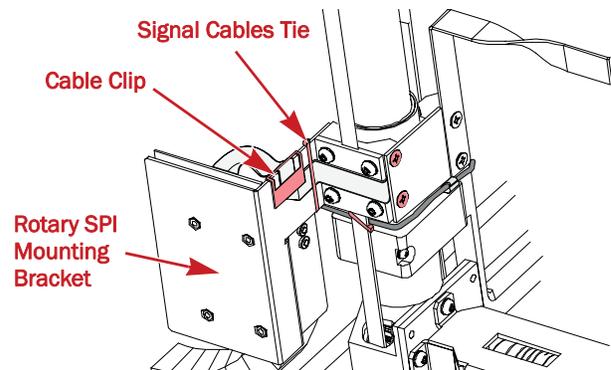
Reverse Angle of Rear Z-Axis Assembly
